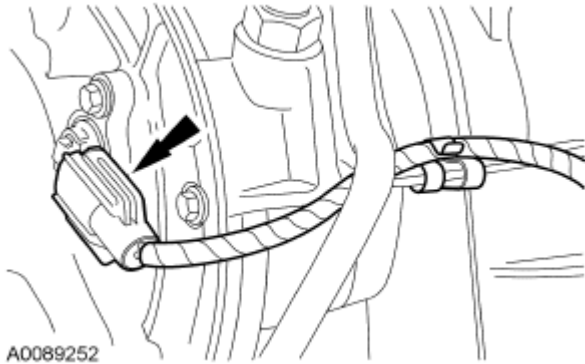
Locating Turbine Speed Sensor (TSS) Electrical Connector
